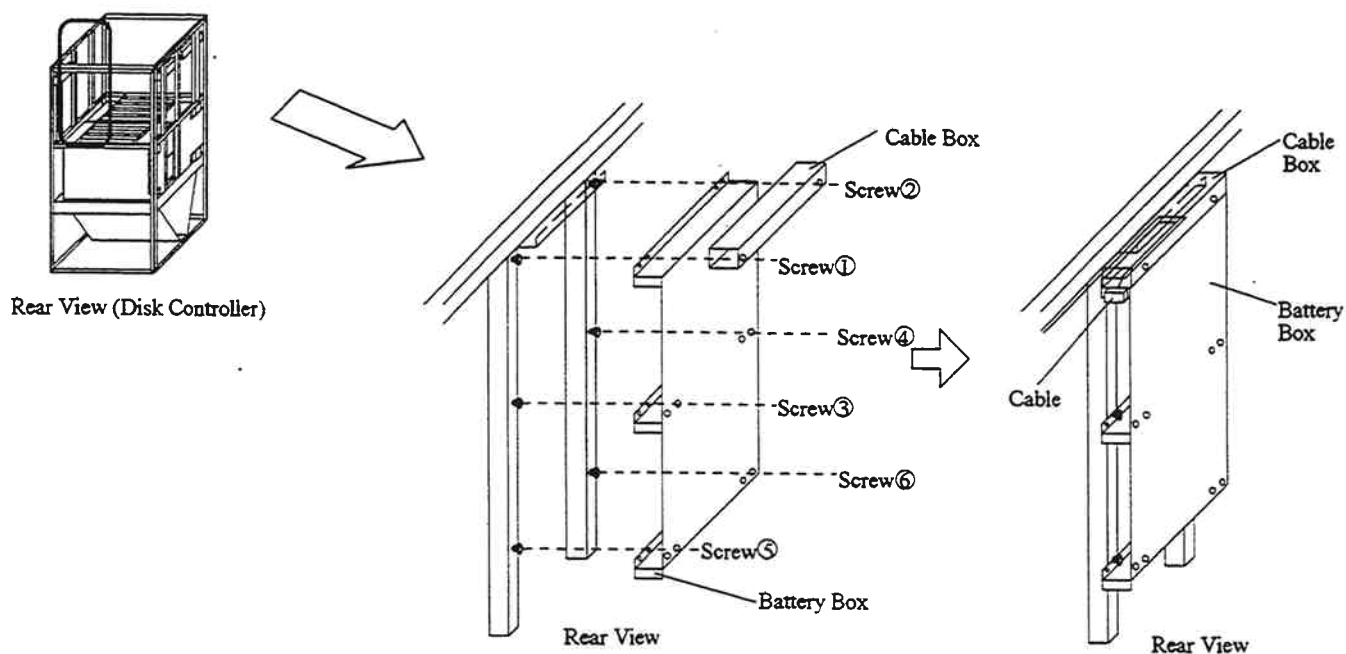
Removal of the Battery Box
